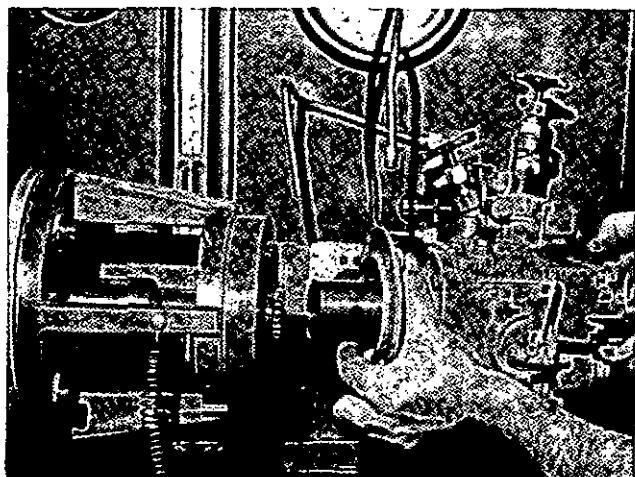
, (F5169). Mount the fuel pump with the spline drive.
